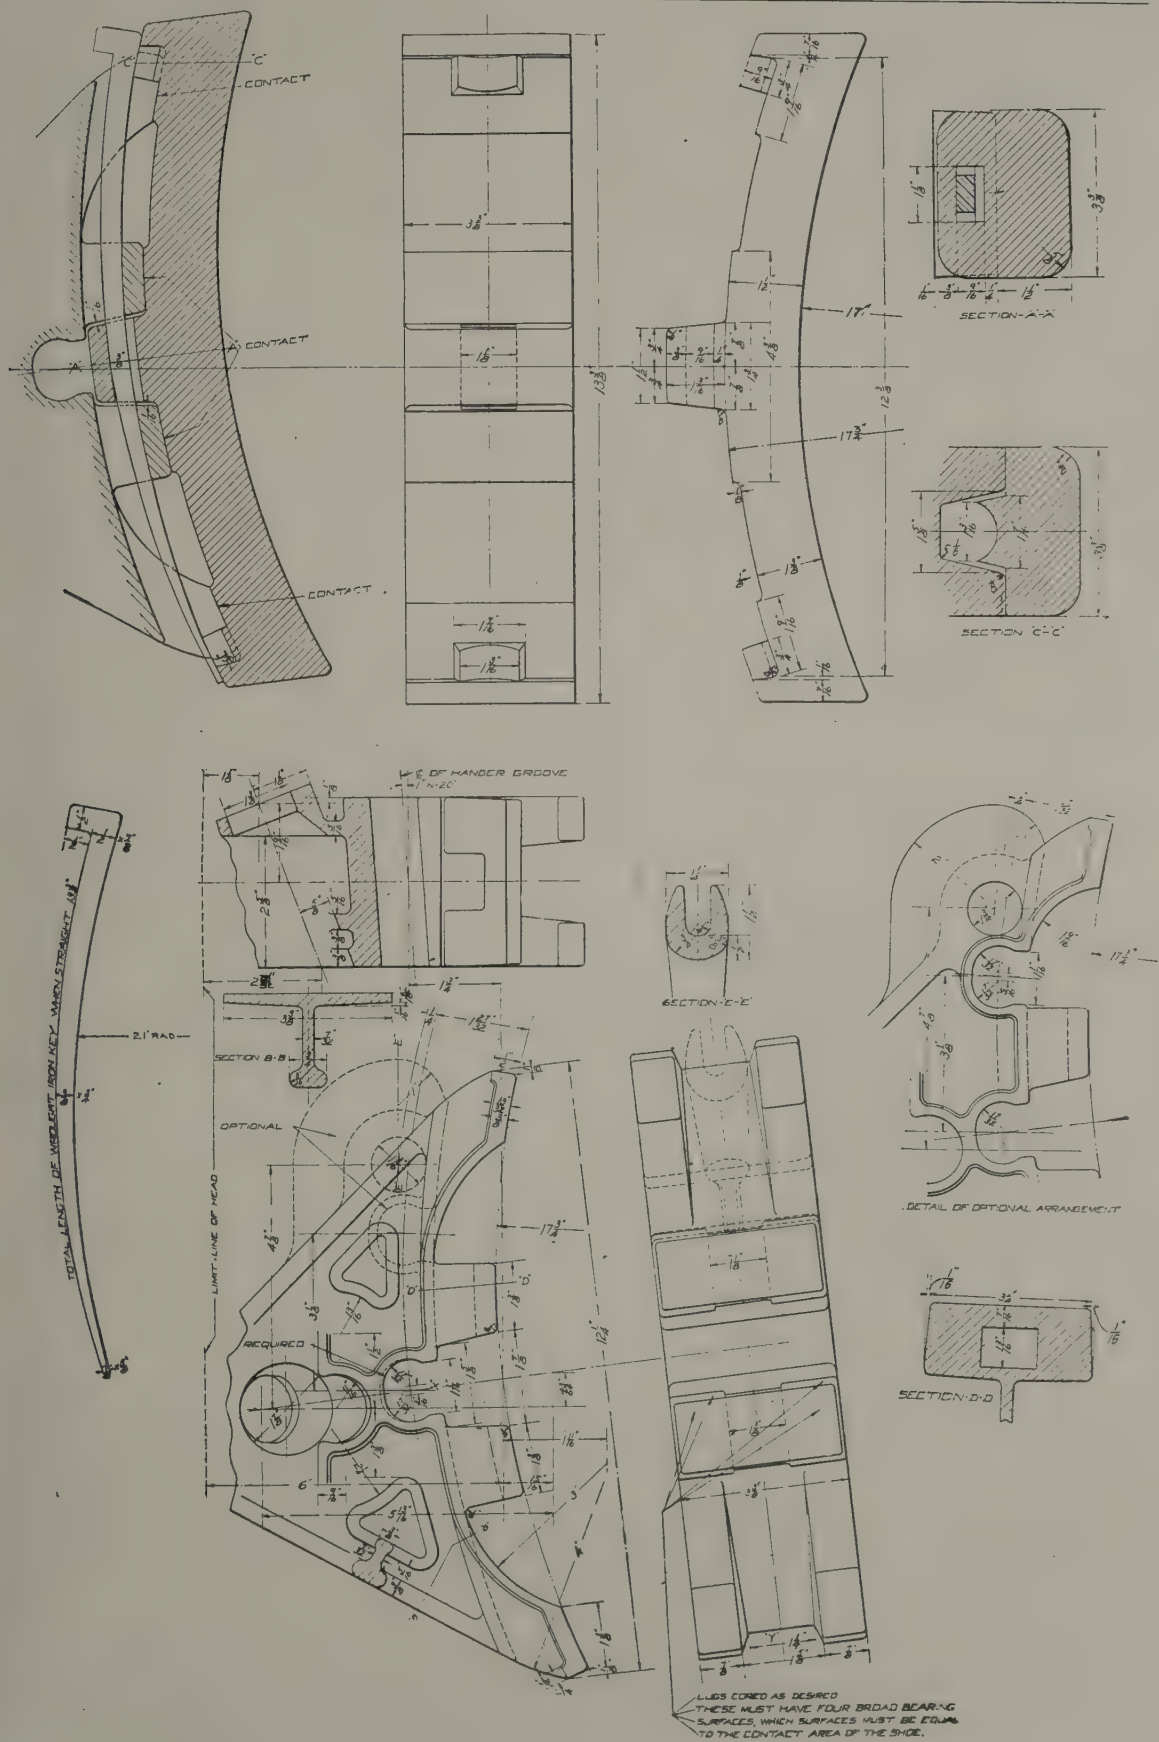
Standard Brake Head, Shoe and Key. (M. C. B. Sheet 17.)
